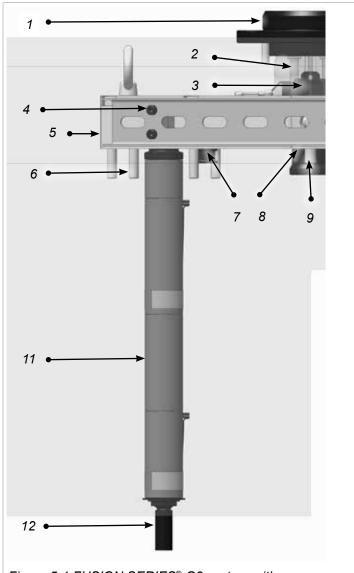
FUSION SERIES® G2 system with thread nozzle
